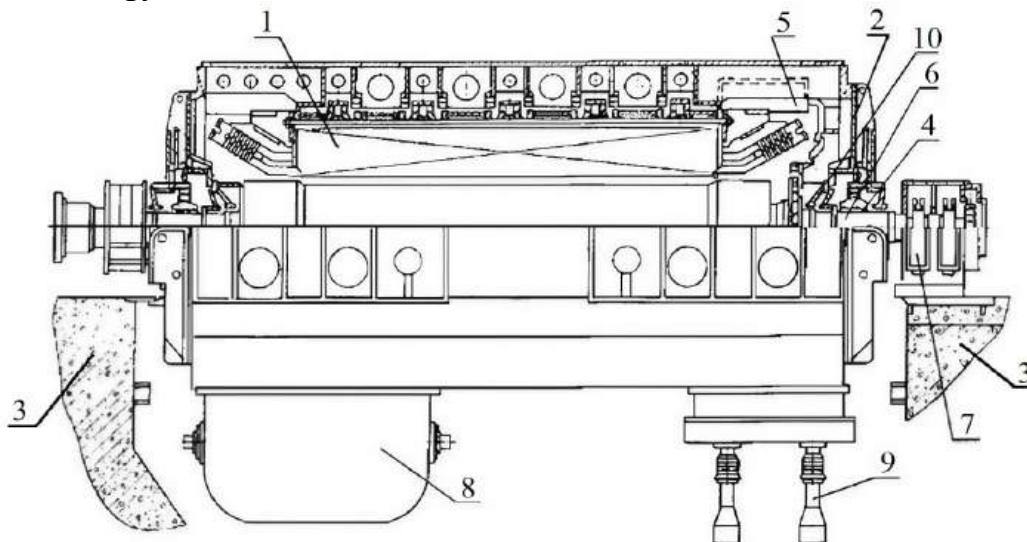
Design of the 300 MW Turbogenerator (1 – stator, 2 – outer shield, 3 – foundation, 4 – rotor, 5 – rotor shaft seal, 6 – bearing, 7 – brush-contact apparatus, 8 – gas cooler, 9 – stator winding terminal, 10 – oil catcher)
